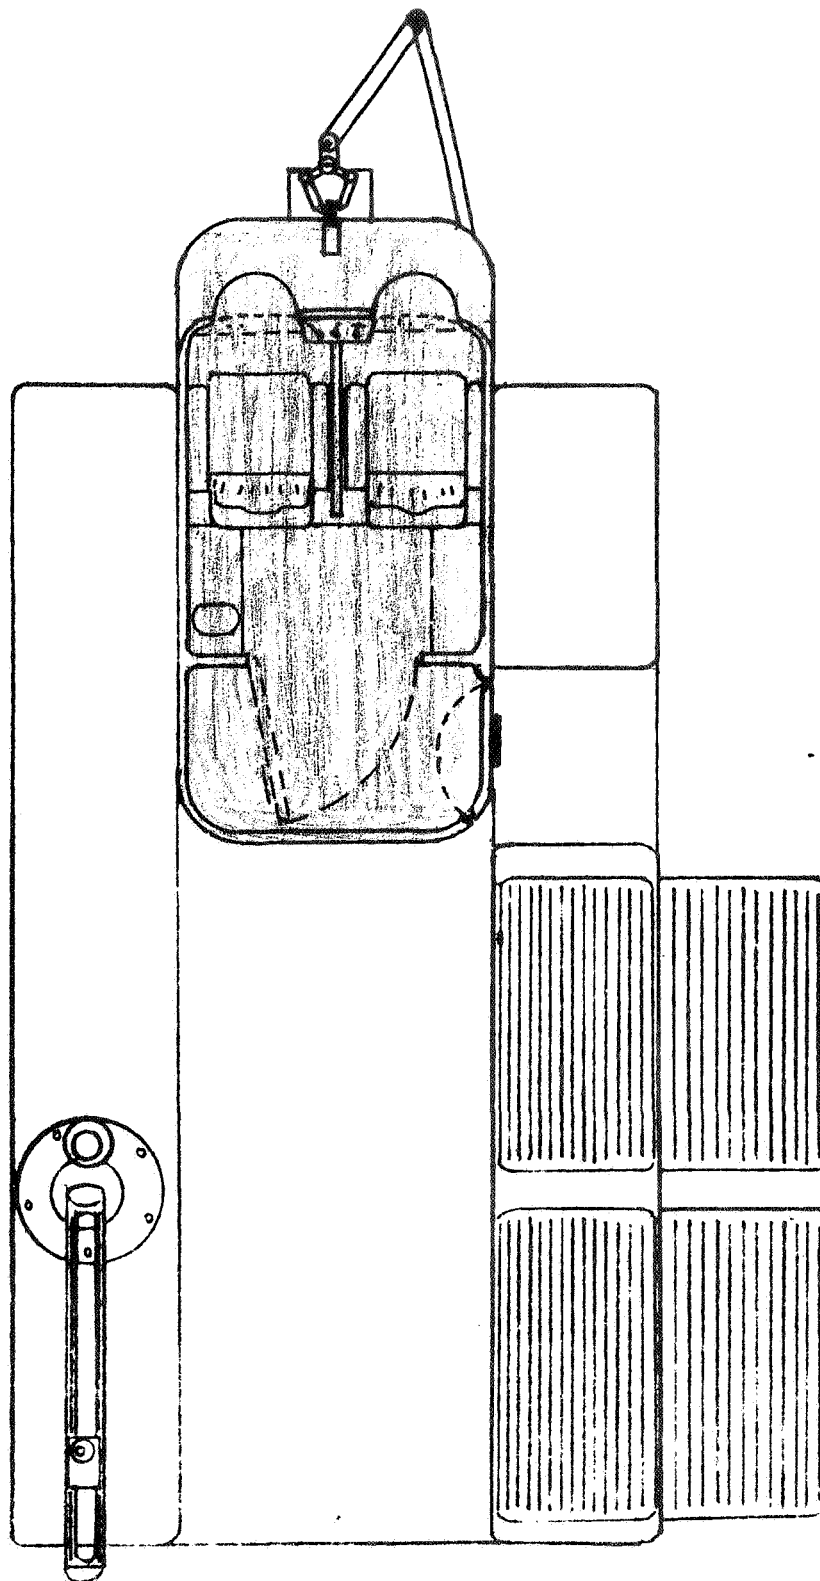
9. CABIN SUBSYSTEM - TOP VIEW
